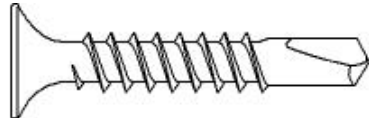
SD AND SDZ BUGLE HEAD SCREW
